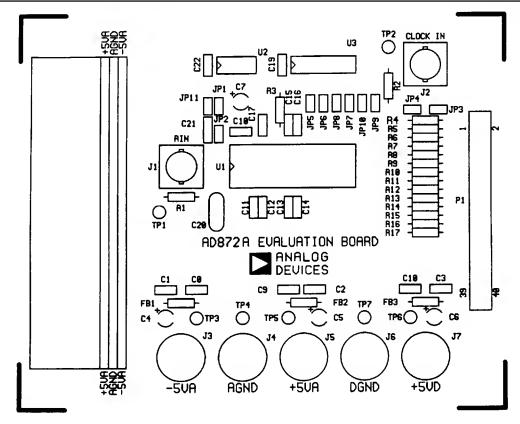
Silkscreen Layer PCB Layout (Not Shown to Scale)
